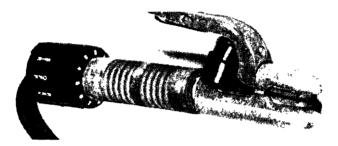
An electrode holder equipped with a convenient stop-start switch, a polarity switch and a five current adjustment. The electrode cable is of special construction which incorporates control wires that lead back to a control box mounted on the D.C. arc welding machine
